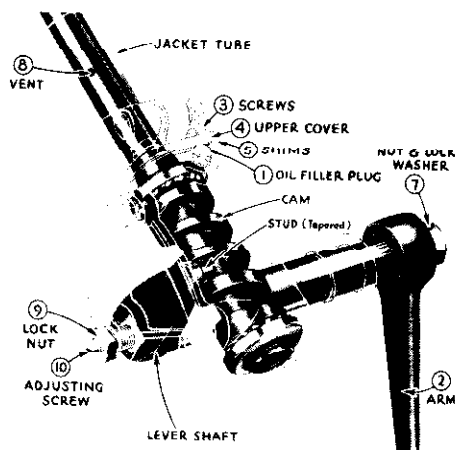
Illustration No. 54—Phantom View of Steering Gear J-15 and J-20 Models
